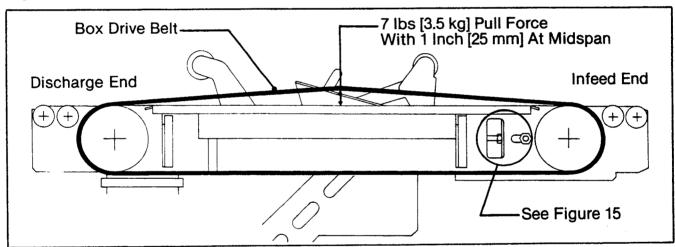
Box Drive Belt Tension Adjustment - Left Side View
